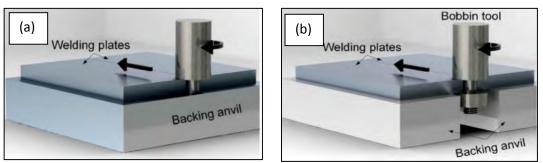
The operation of friction stir welding (Esmaily et al., 2016). (a) CFSW (b) BFSW
